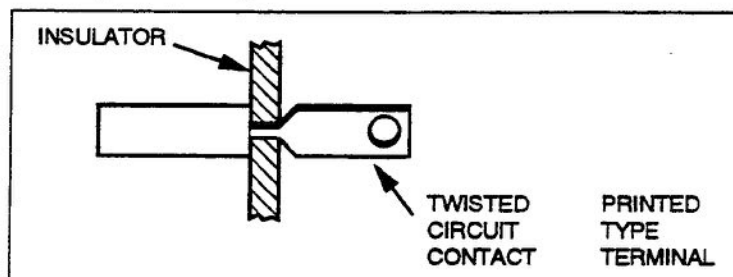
PCB contact retained by twisting the rear part of the contact.
